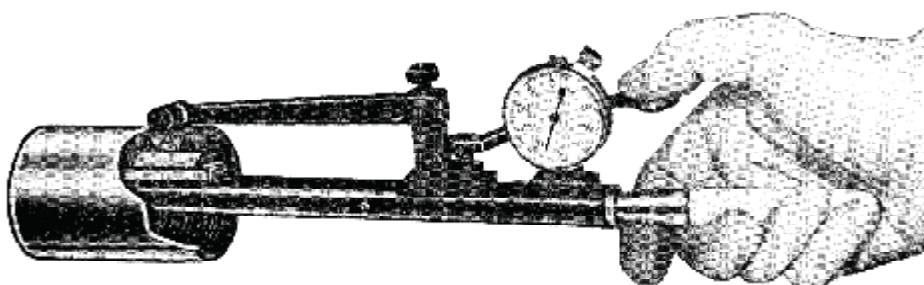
Typical Thread Height Gauge for Internal Threads in Nominal Sizes Smaller than 3
